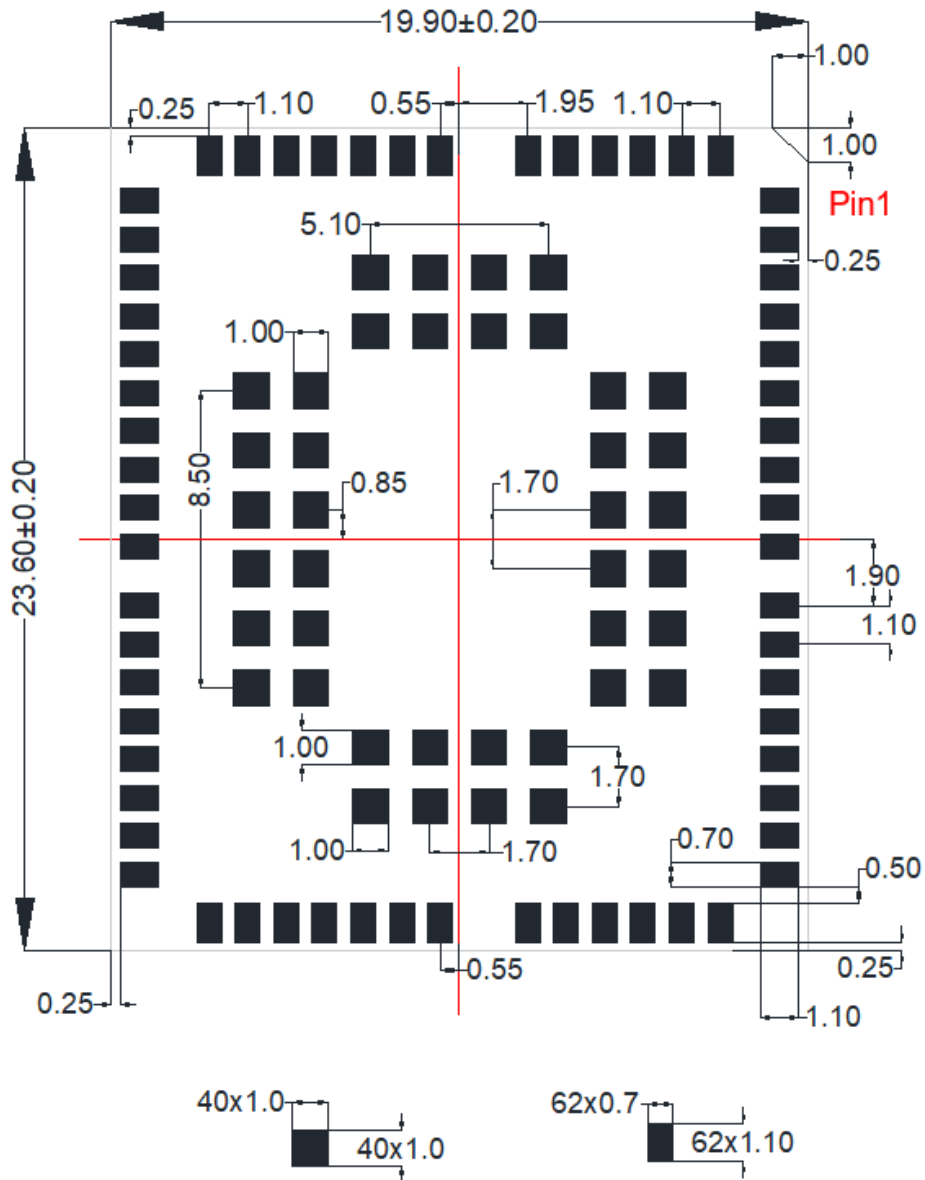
Module Bottom Dimensions (Bottom View, Unit: mm)
